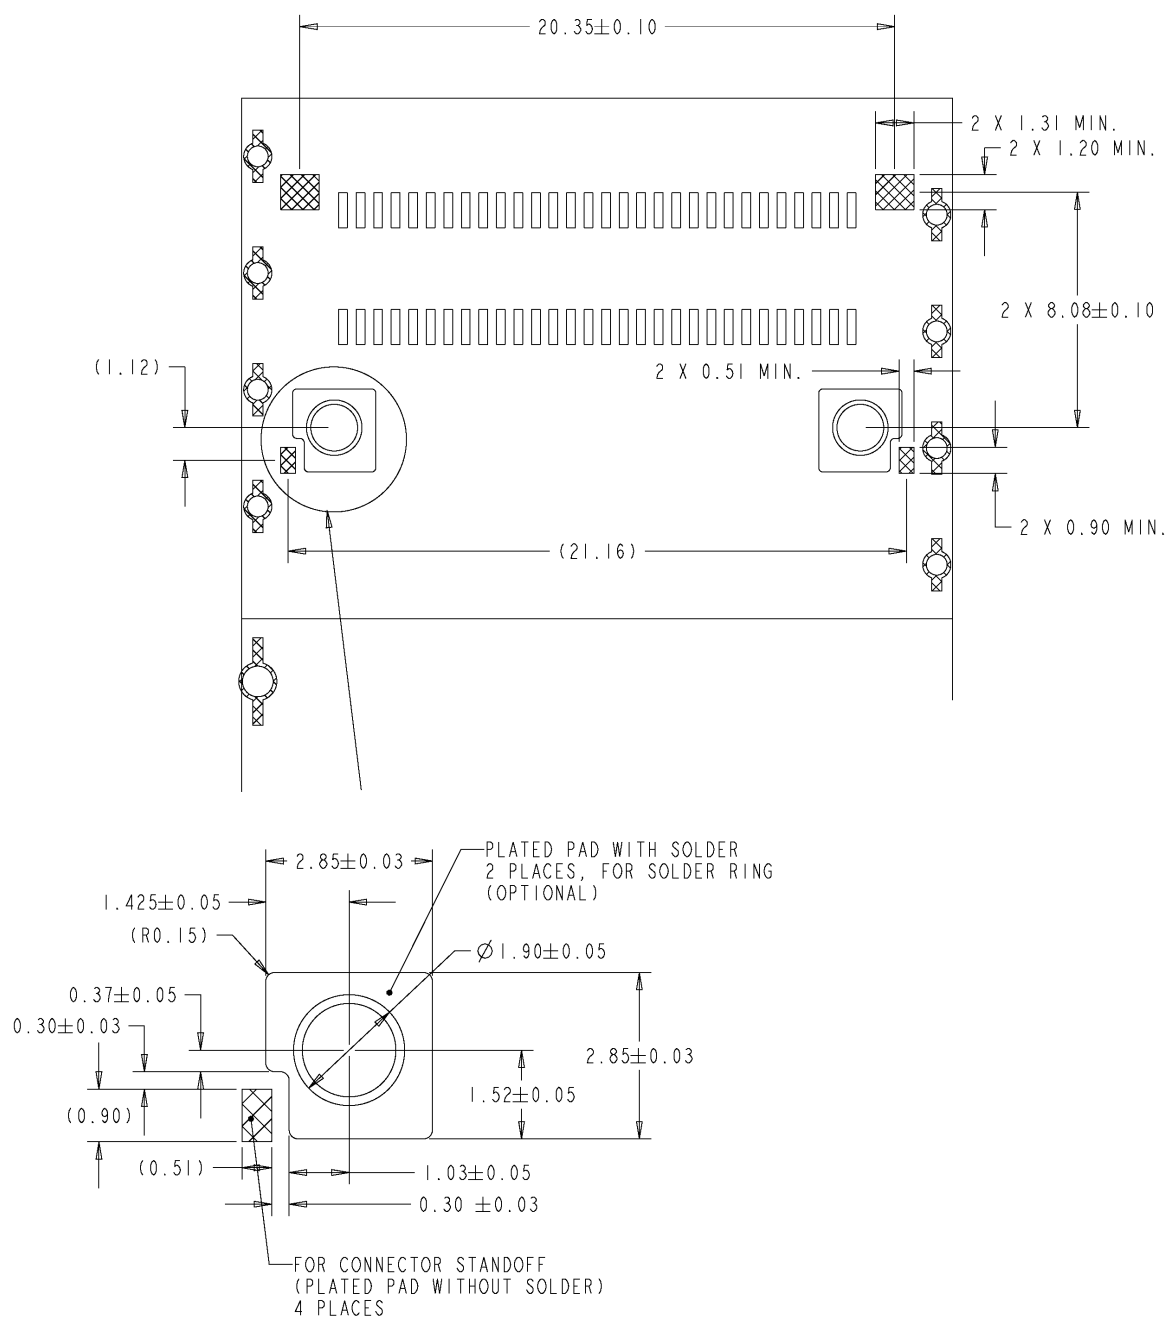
Plated pad for cage pin (Detail cage pin)
